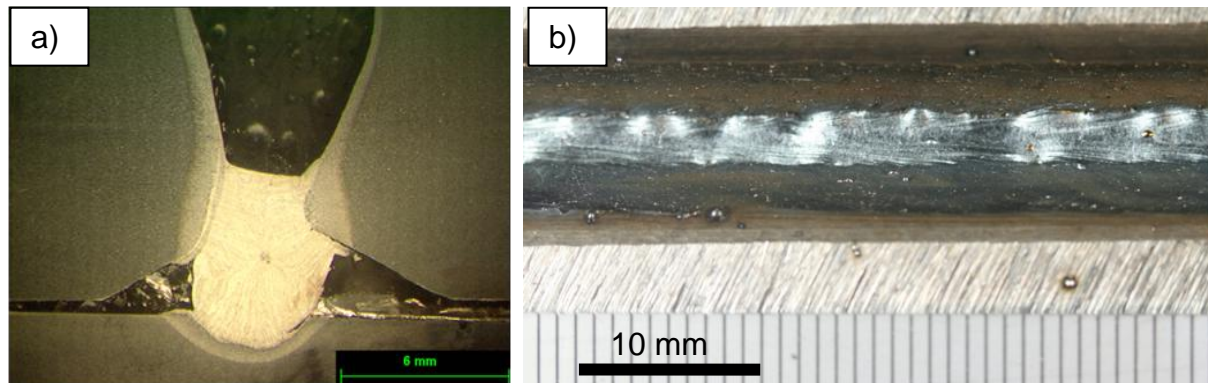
Butt-weld on misaligned X-prep with 2 mm horizontal gap configuration with backing plate ($v = 3 \text{ m min}^{-1}$, $WFS = 2 \times 20 \text{ m min}^{-1}$, $P_{AI} = 17.2 \text{ kW}$, $P_L = 7 \text{ kW}$, $d = 1.2 \text{ mm}$ (defocused by 10 mm), $q_p = 0.6 \text{ MW cm}^{-2}$, $\tau_i = 24 \text{ ms}$, $E_{SP} = 168 \text{ J}$, transverse configuration of wires); a) macrograph; b) top bead.
